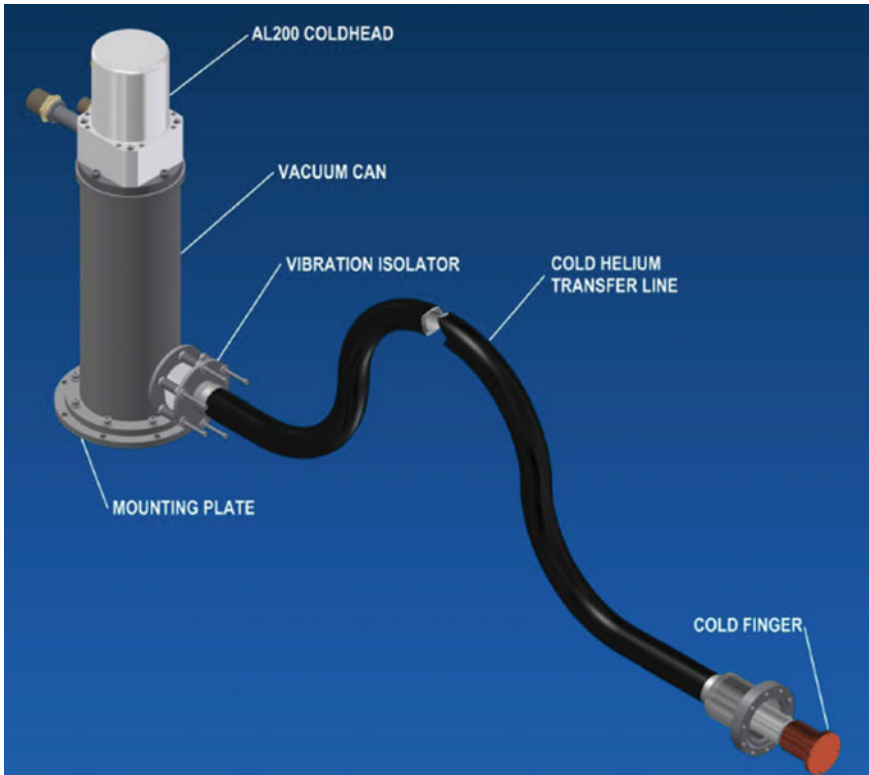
Cryocooler cold finger cooling with cold helium transfer line (*courtesy of ICC Press*)
